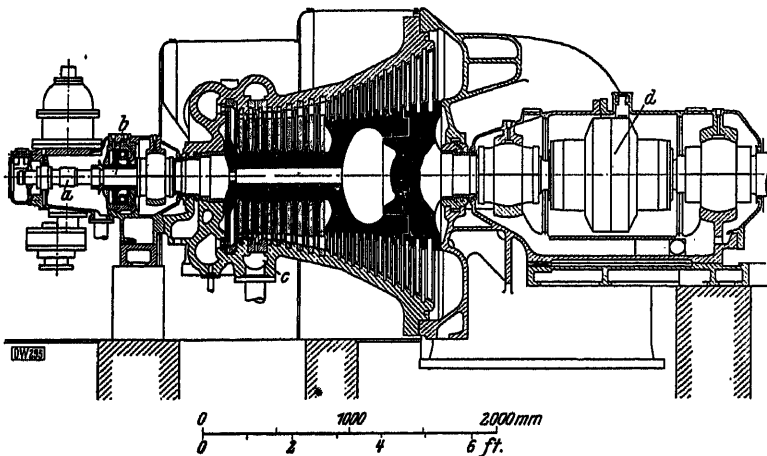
Erste Br nner*, 10,000 kw., 3000 R.P.M. high-pressure turbine
